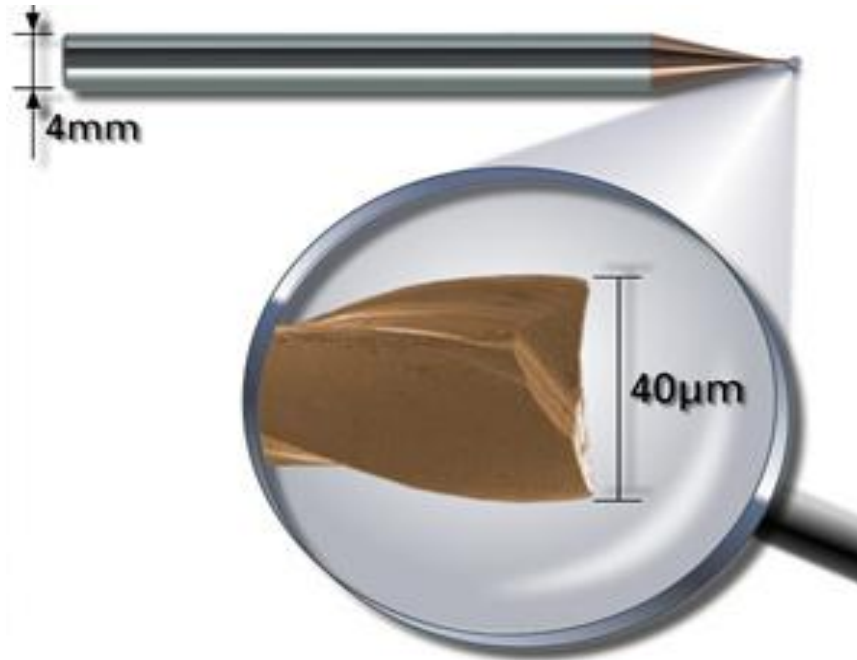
40 µm tungsten carbide end mill (Hitachi Tool Engineering, Ltd.).
